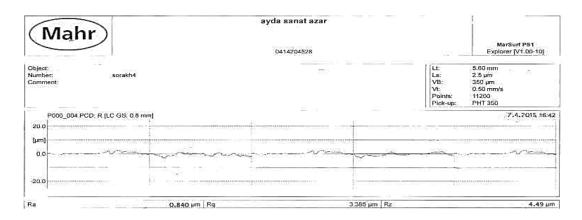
Surface roughness profile of the first hole (drilled with 0.06 (mm/rev) feed rate, 500 (rpm) spindle rotation speed, and cutting fluid containing 90 μm alumina particles).
